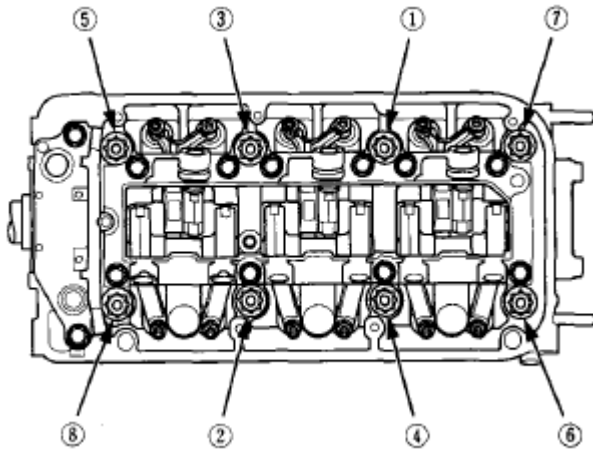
Identifying Cylinder Head Bolts With Tightening Sequence (Front)
